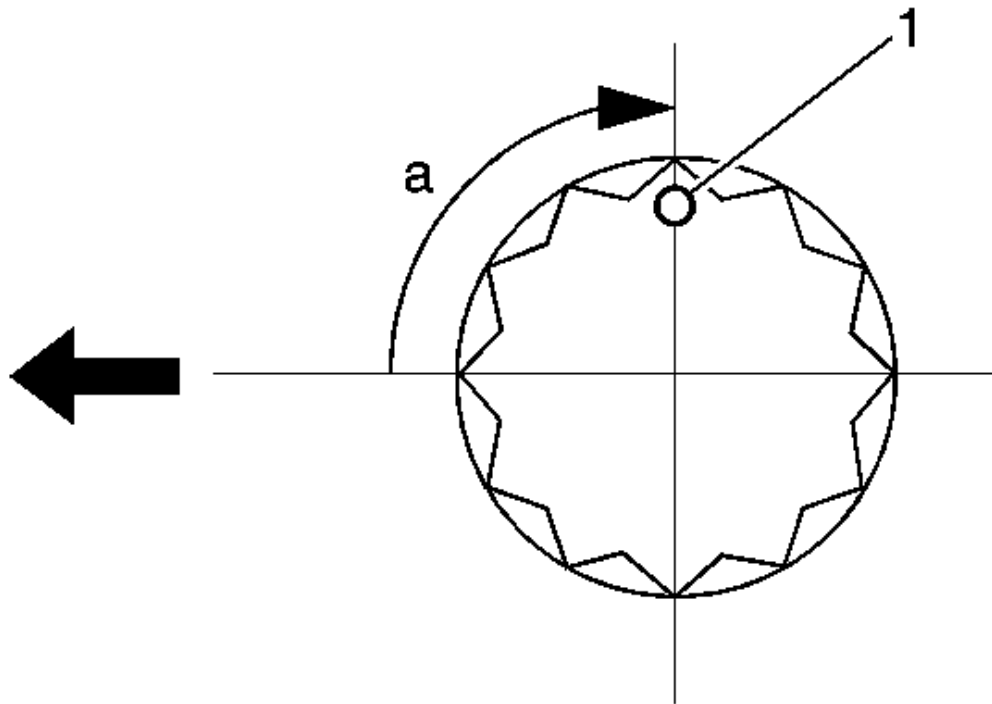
Identifying Bearing Cap Bolt Tightening Final Step
